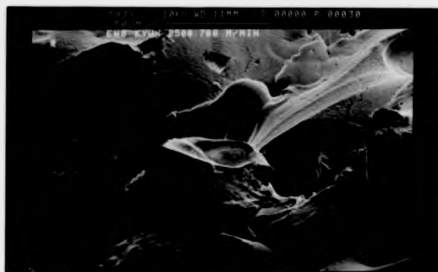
Enlarged view of a fractured surface of KYON 2500 when machining EN8 at the speed of 700 m/min
